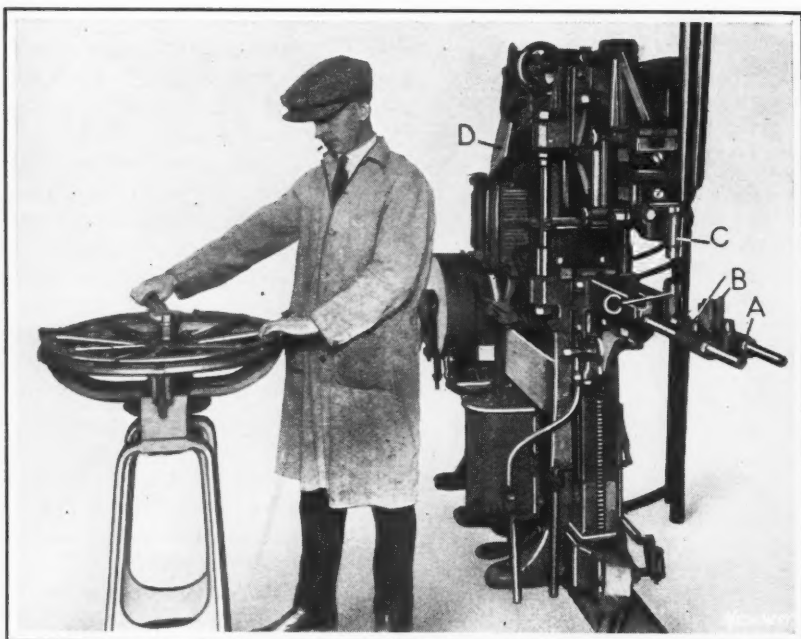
Floor Stand and Spot-welding Machine used in assembling Spokes in Flanges and Rims
